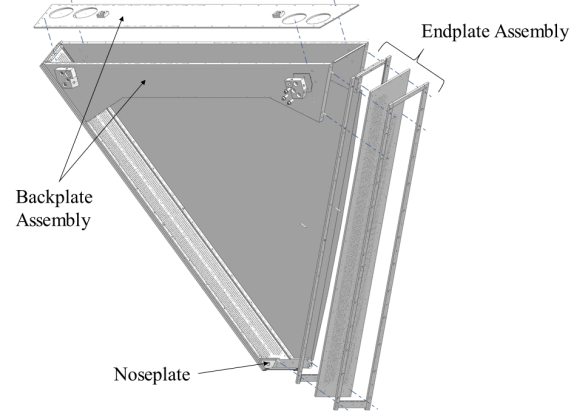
Assembly of a typical drift chamber (here a R1 sector) highlighting the common component parts in all CLAS12 drift chambers.
